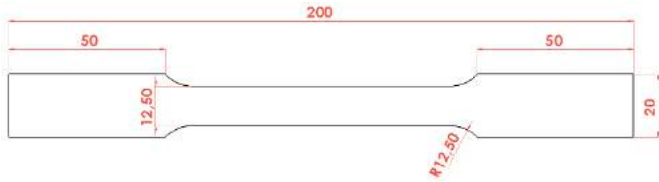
Dimension of the tensile test specimen of the base metals (ASTM E-8M sheet type specimen) [24].
